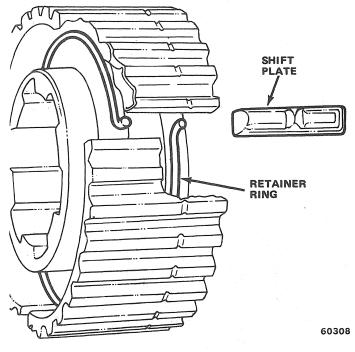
B-46 Third-Fourth Synchronizer Shifting Plate and Retaining Ring Installation
